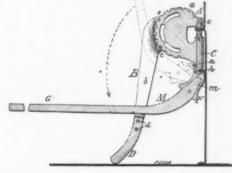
At Work on the Side of a Tank, Making a Horizontal Seam.
